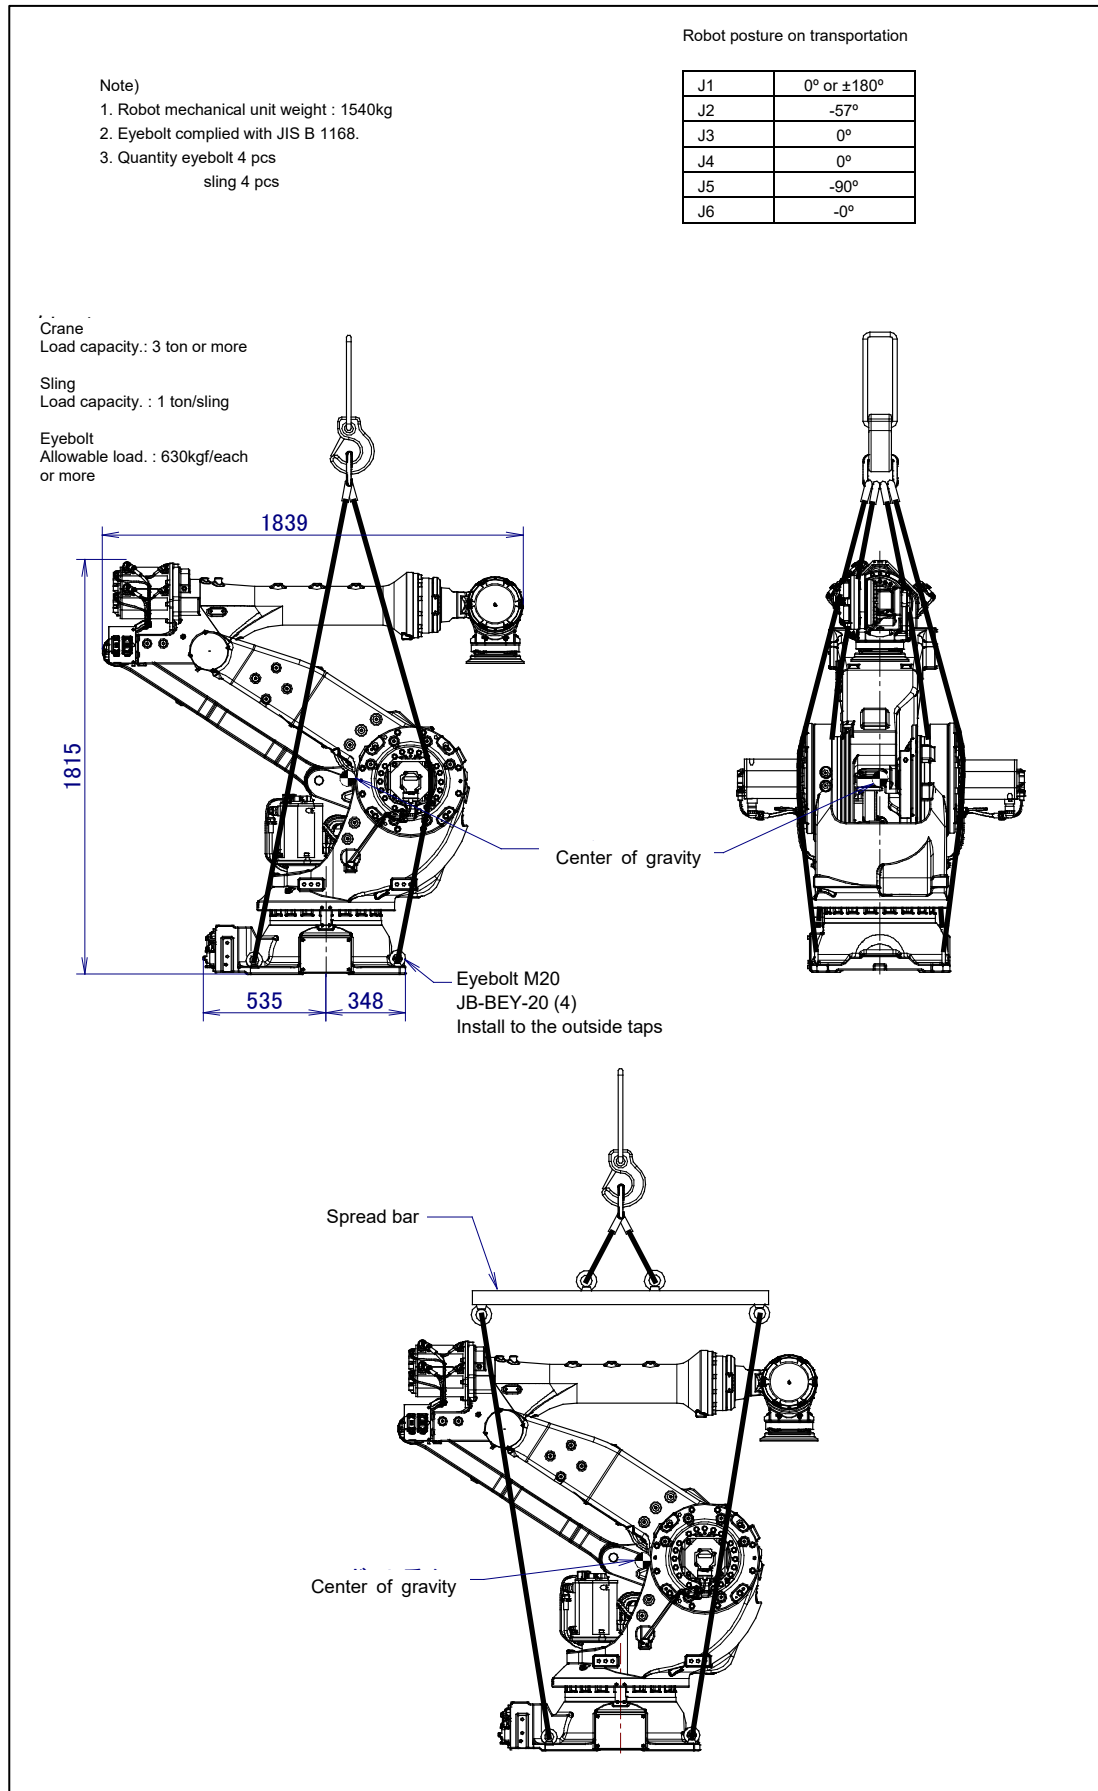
(b) Transportation using a crane (M-900/B/360/360E)
